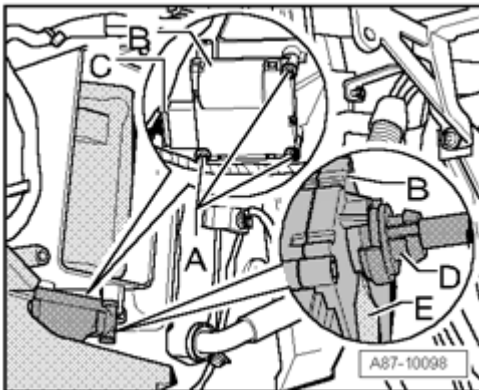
Identifying Connector, Bolts, Connecting Element, And Control Motor
